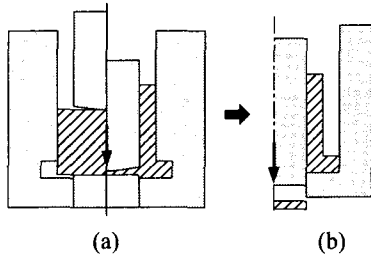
Forming process of a hollow T-shaped part using a solid initial billet (method-3), (a) backward extruding and injection forging process and (b) piercing process
